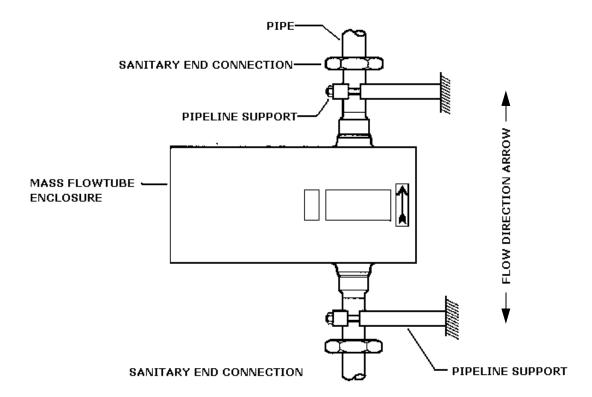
Flowtube Mounting with Threaded or Sanitary End Connections - Vertical Pipeline
